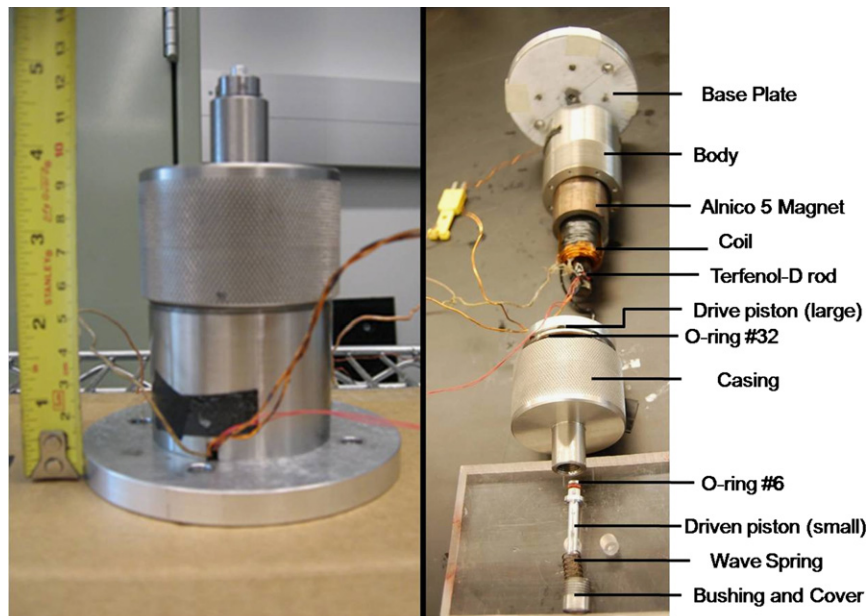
Assembled and exploded view of the hydraulically amplified magnetostrictive actuator.
